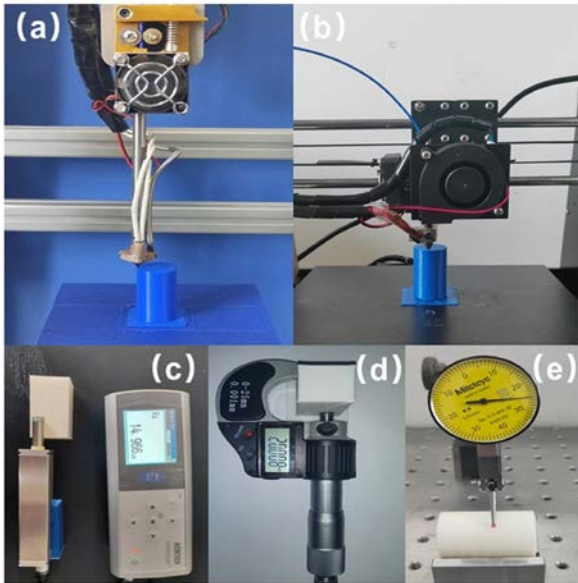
The printing process and measurement of the testing specimen; a) 5-axis printing, b) 3-axis printing, c) surface roughness measuring, d) dimension error measuring, e) proper alignment measuring
